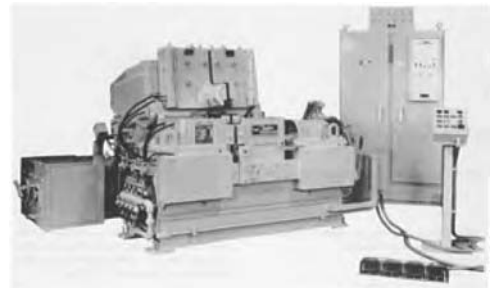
Flash-welding machine with capacity to weld rings up to 4.6 m (15 ft) in diameter
